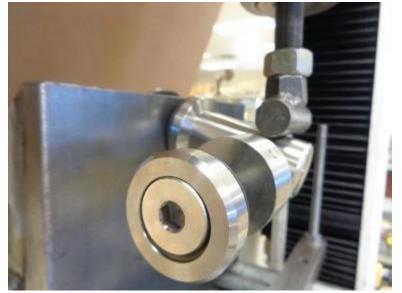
Typical Failure for Horizontal Shear Loading Classic VP Style Hook Fitting
